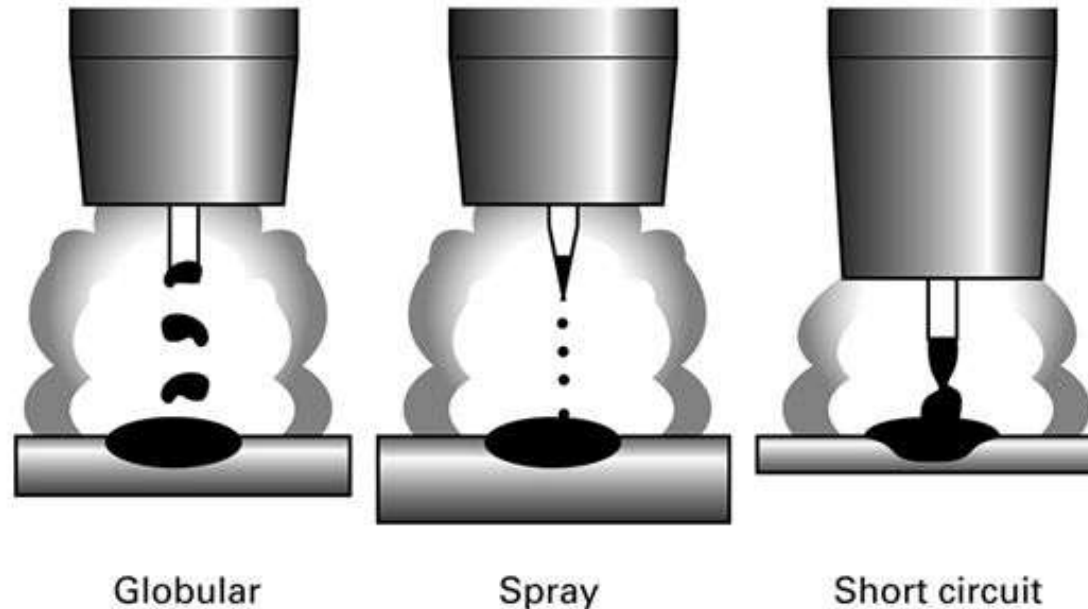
Metal Transfer in Gas Metal Arc Welding
